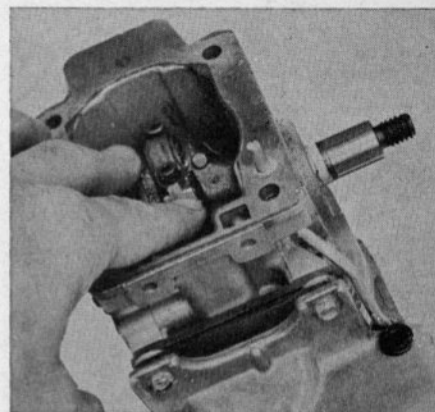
When connecting rod cap is properly installed, no "catch points" can be felt when rubbing finger nail across rod and cap parting line.
